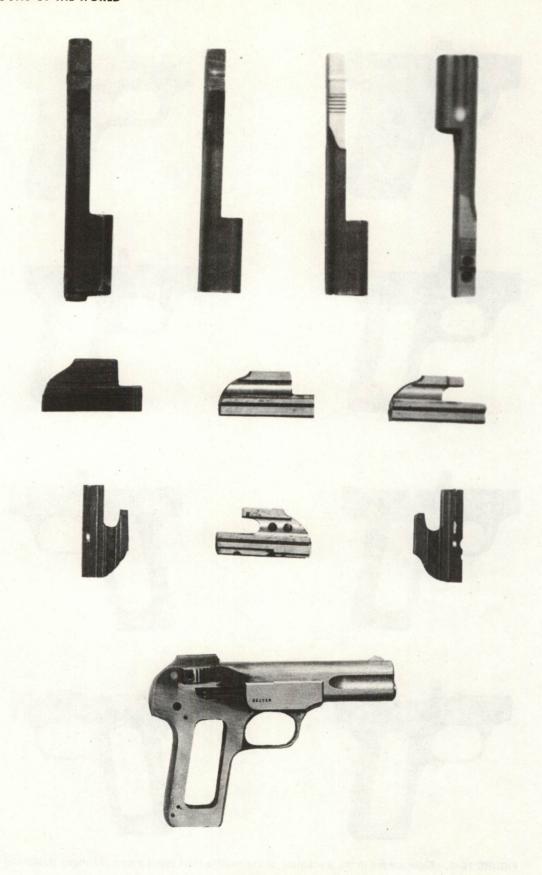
Stages in the machining of the slide and side plate of the Modèle 1900 pistol. Below is a partly completed Modèle 1900, serial number 632,719. (Fabrique Nationale)
